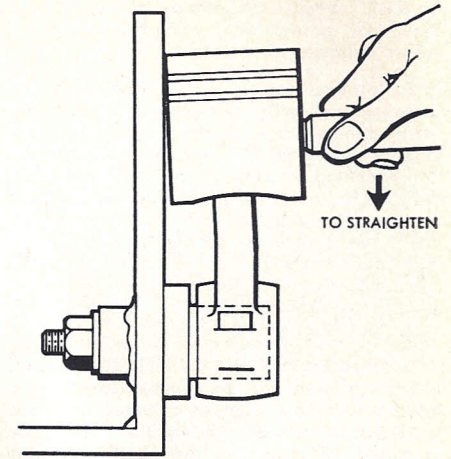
To straighten bent or twisted connecting rod, mount rod and piston assembly on alignment jig, insert bar in piston pin through open end needle bearing and apply force in direction necessary to straighten rod. (Balance piston does not use needle bearings).
